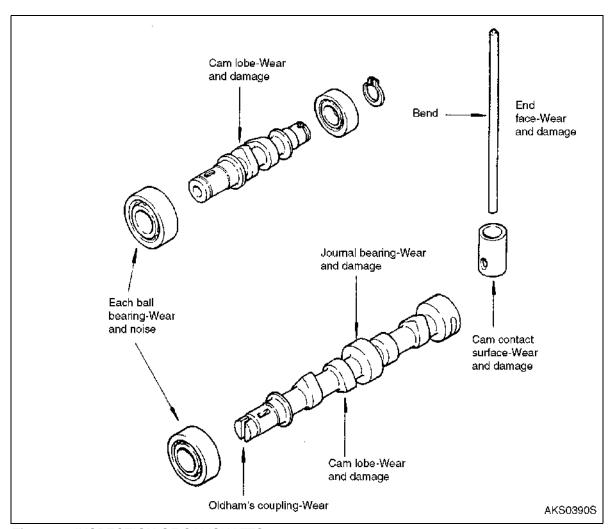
INSPECTION OF CAMSHAFTS
